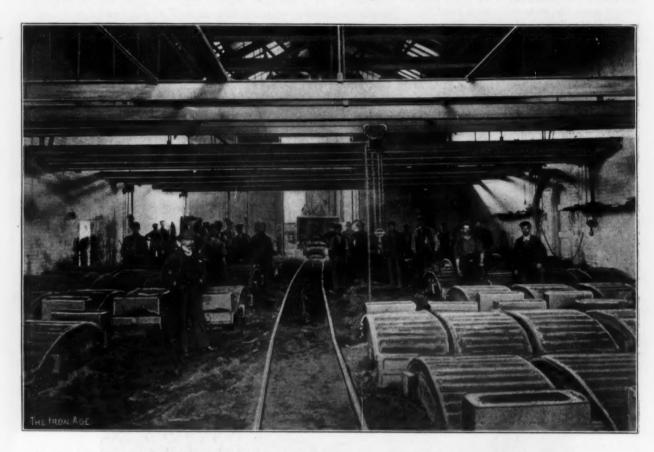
Interior View of the Segment Foundry, Showing the Arrangement of the Molds and the Traveling Hand Hoists Used in Manipulating the Molds and the Pouring Ladles.—The Metal is Brought from the Biast Furnace in Ladles Carried by a Locomotive Crane.
